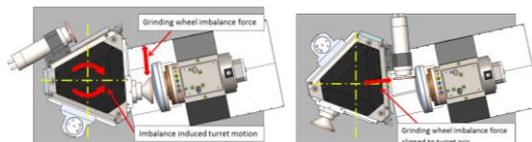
Wheel imbalance forces for peripheral (left). Cup wheel grinding (right).
